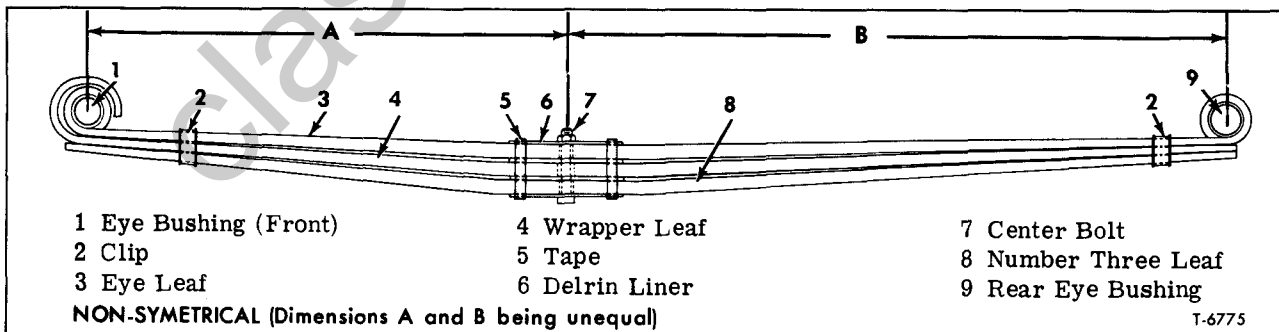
Tapered Leaf Front Spring Assembly (Non Symmetrical Type Spring)
